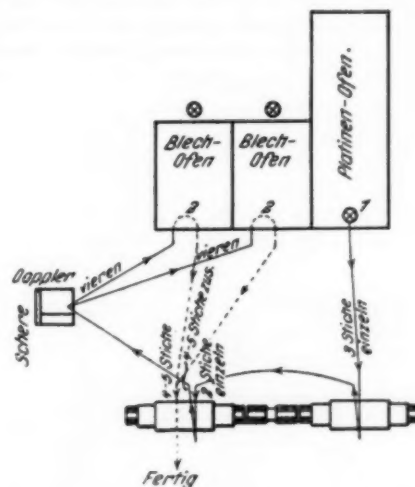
GERMAN DOUBLE MILL FOR TWO-HEAT PROCESS. SHEETS $39.37 \times 78.74 \times 0.019$ IN. SHEET BARS 9.84×0.374 IN., ROLLED IN PAIRS
